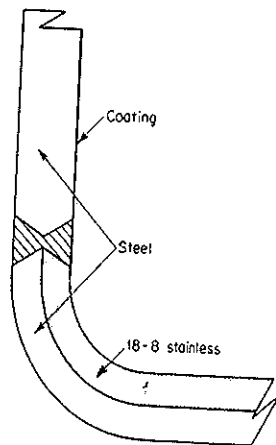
Detail of welded steel and stainless clad tank construction.
